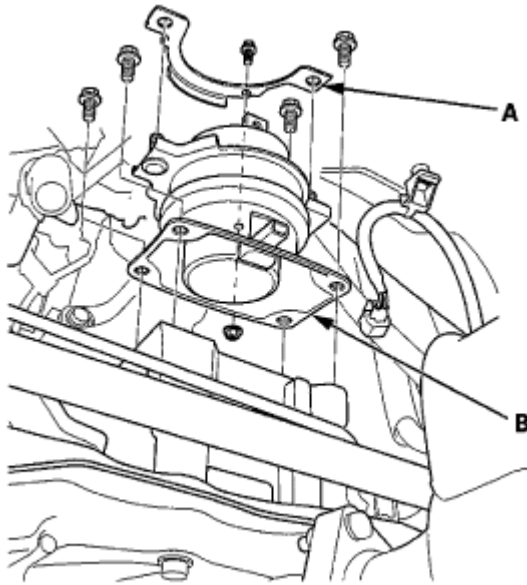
Identifying Rear Engine Mount Bracket And Rear Engine Mount
